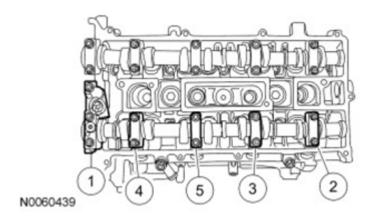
Identifying Camshaft Bearing Cap Bolts Loosening Sequence Courtesy of FORD MOTOR CO.
